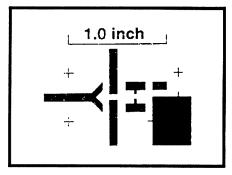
PCB Etching Pattern for 1/32 inch Teflon Board.
